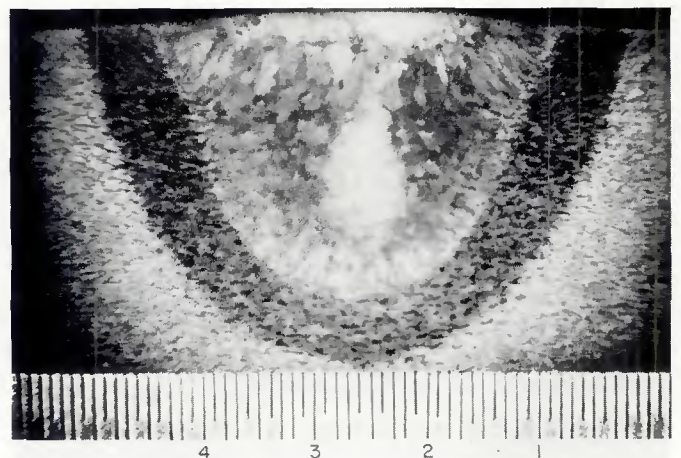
Macrograph showing HAZ and nugget — no backing
